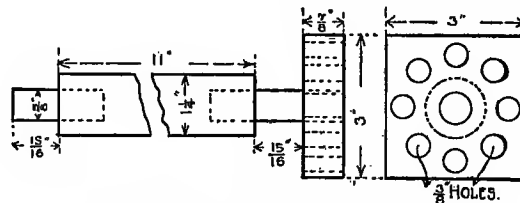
Warp and Carpet Rolls. Two Pieces
